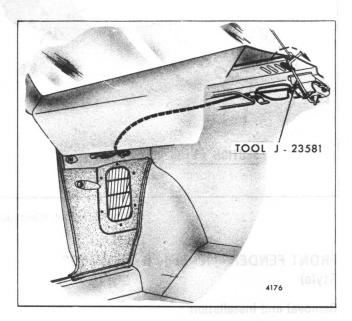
Hood Latch Auxiliary Release Tool - "H" Body (Less "07,27" Style)
